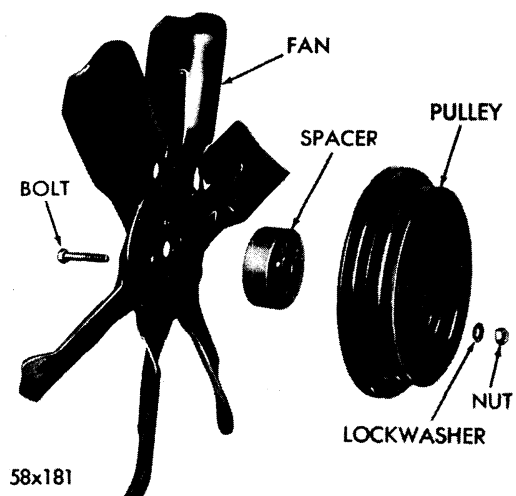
Standard Fan Drive (Exploded View) (Used without Air Conditioning)
